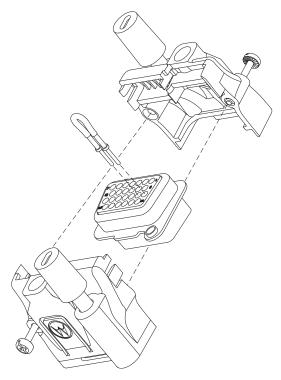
Exploded View of Accessory Connector Assembly (HLN6863)
